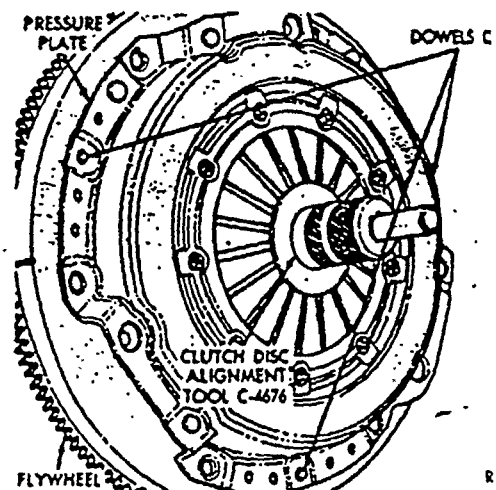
A-460, A-465, and A-525 Manual Trans Clutch Disc Aligning Tool
